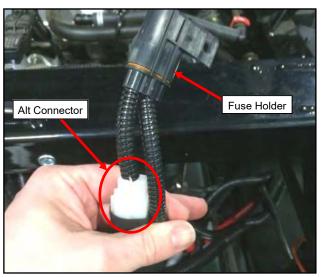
(Connect Alternator Harness, Fuse Holder)
